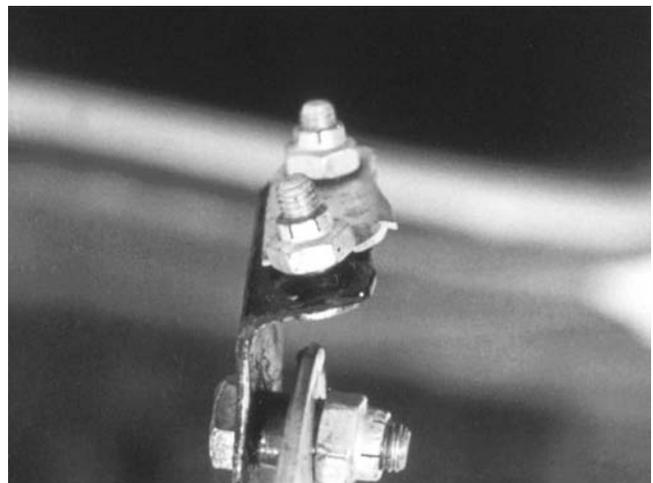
Close-up of fracture surface which, as is common, traverses bolt hole openings. Fracture surface can be examined for evidence of overload failure, metal fatigue, or manufacturing defect (photo courtesy of Civil Aerospace Medical Institute).
